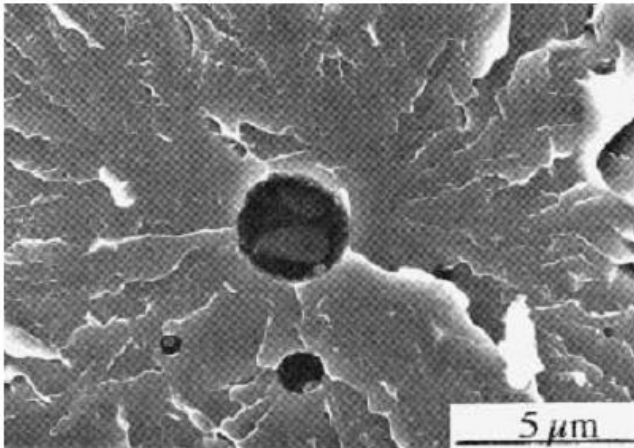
Fracture initiation at an inclusion in flux-cored arc weld of high-strength, low-alloy steel. Reprinted from Bose et al. (54).
